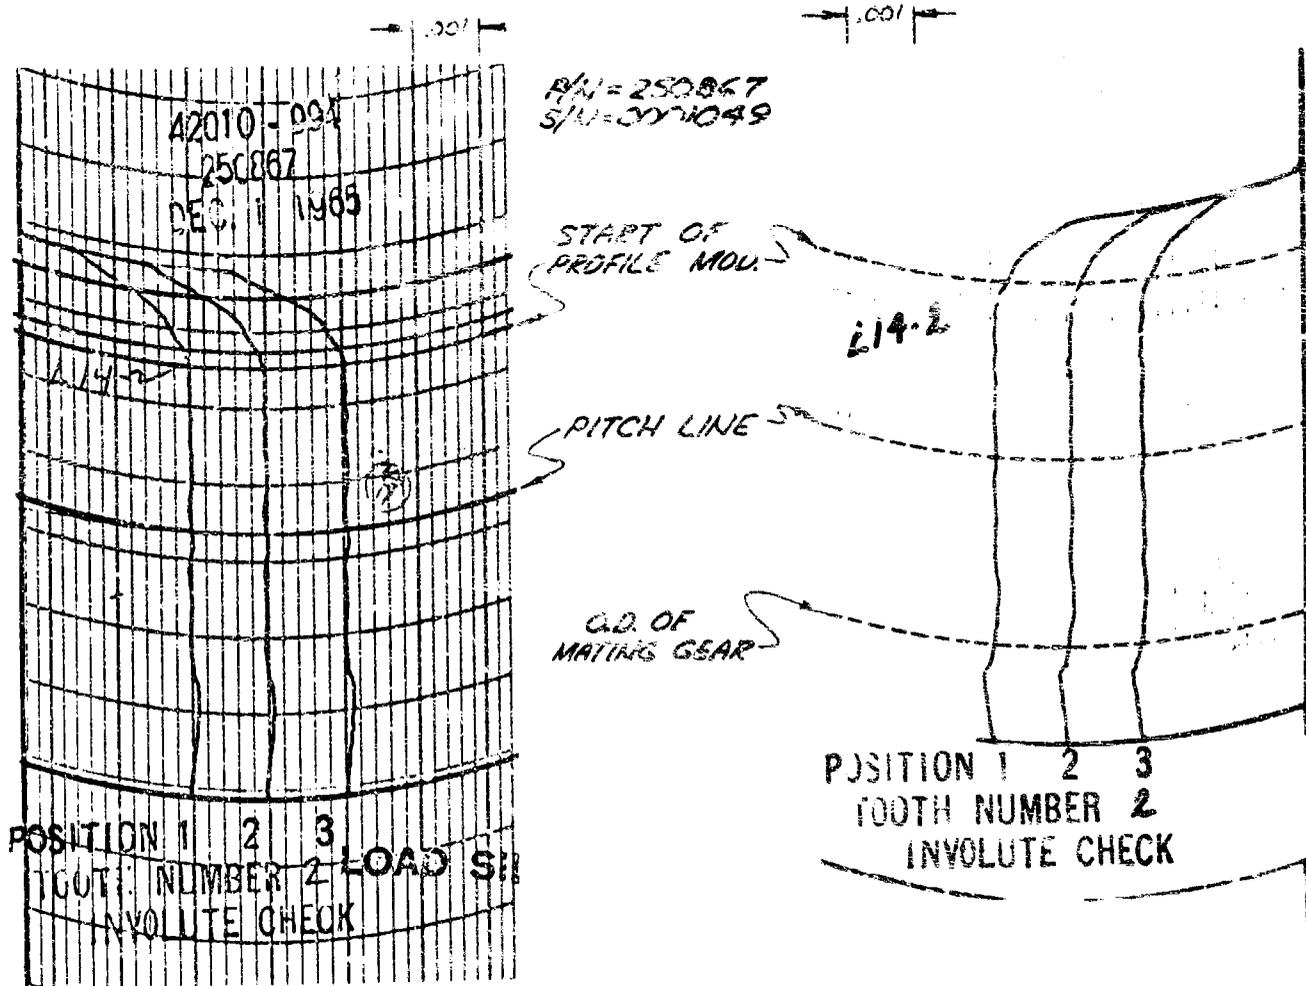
Finion Gear SN 1848 (4720 sec in 4720 Gear Lubricant)
